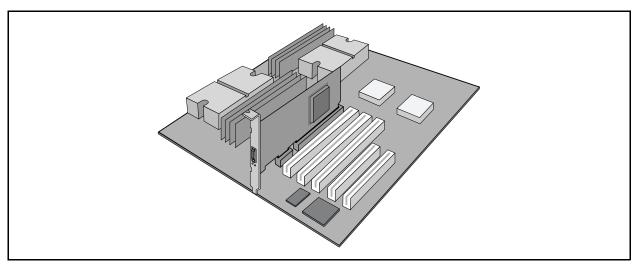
QHT7140 Without Riser Installed in a 3U Chassis
